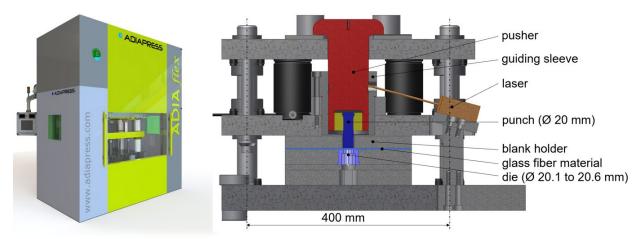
Experimental setup for the HSIC tests: left) high-speed press ADIAflex; right) CAD drawing of the used tool
